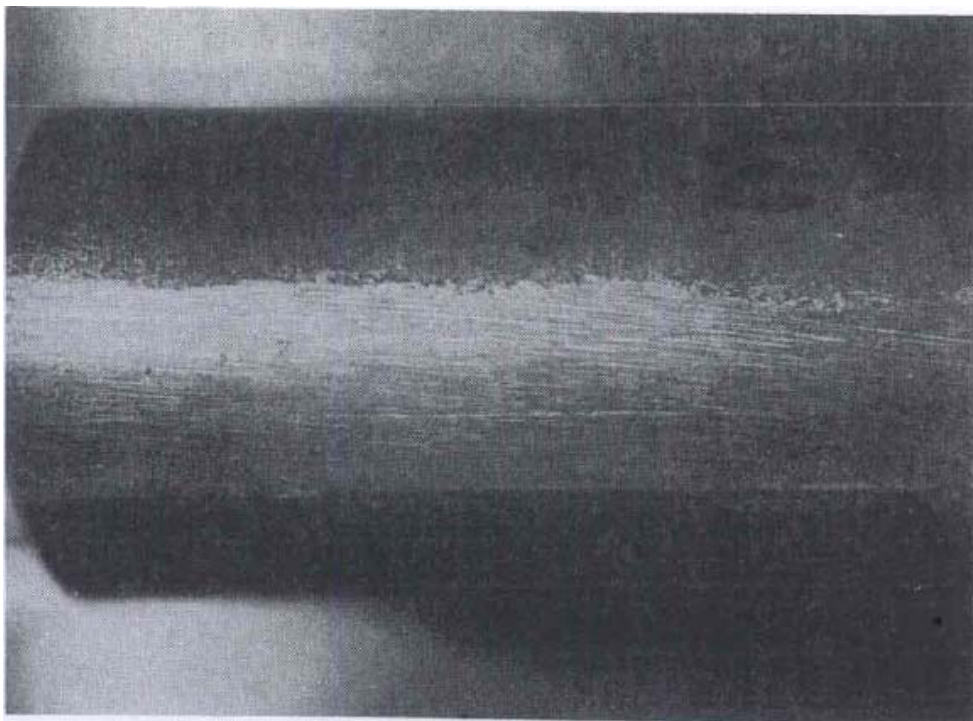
Resistance Welded – 7 ga.
